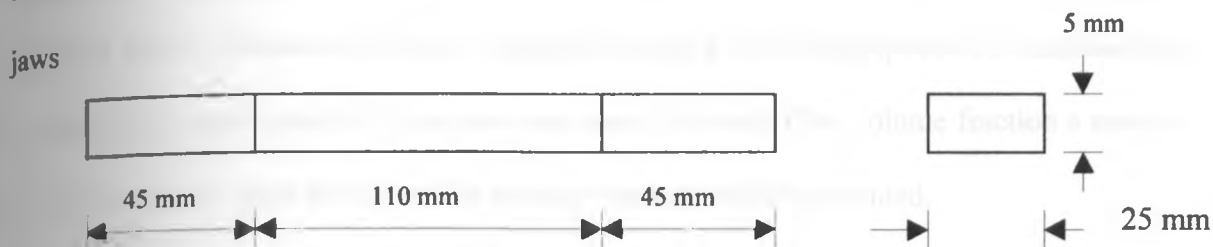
Dimensions of Sisal/Epoxy tensile test specimens
